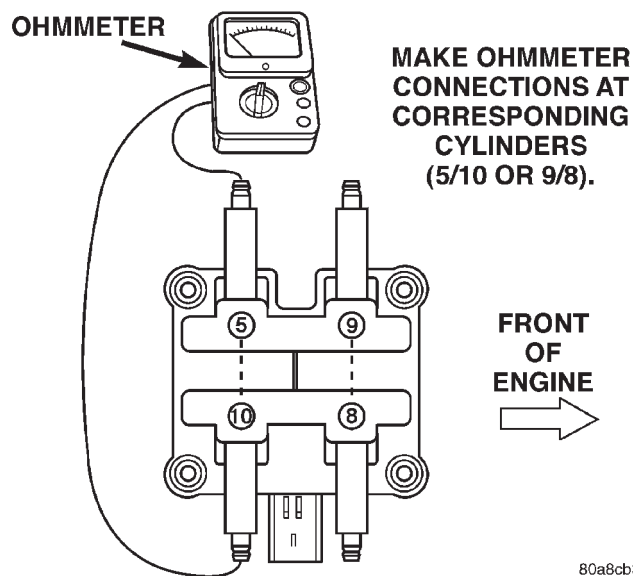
Checking Coil Secondary Resistance—Rear Coils—8.0L V-10 Engine
